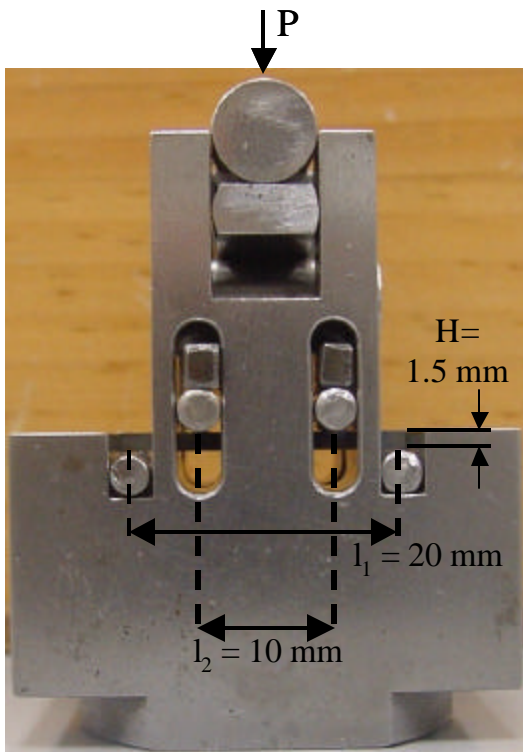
Four-point bend stainless steel fixture with relevant dimensions
